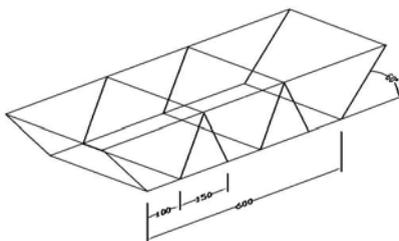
Isometric view of fertilizer box of developed bullock drawn dry paddy seed cum fertilizer drill
